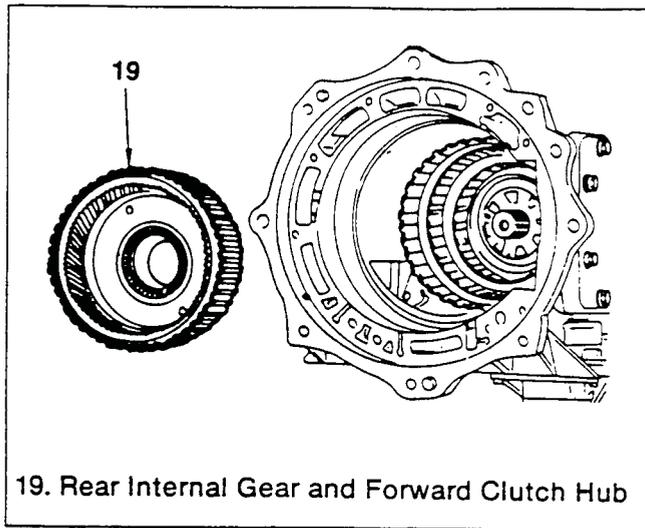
Rear Internal Gear and Forward Clutch Hub Removal
